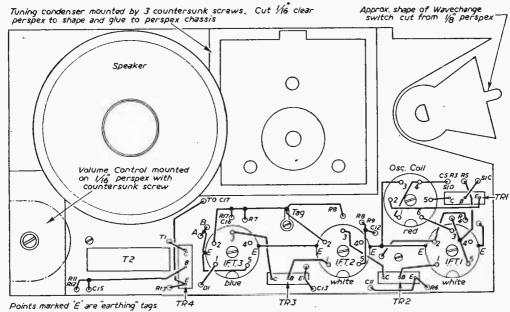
Top side of chassis showing wiring and approximate position of holes to be drilled for components. The wiring shown must not be more than 3/32 in. above the chassis.
